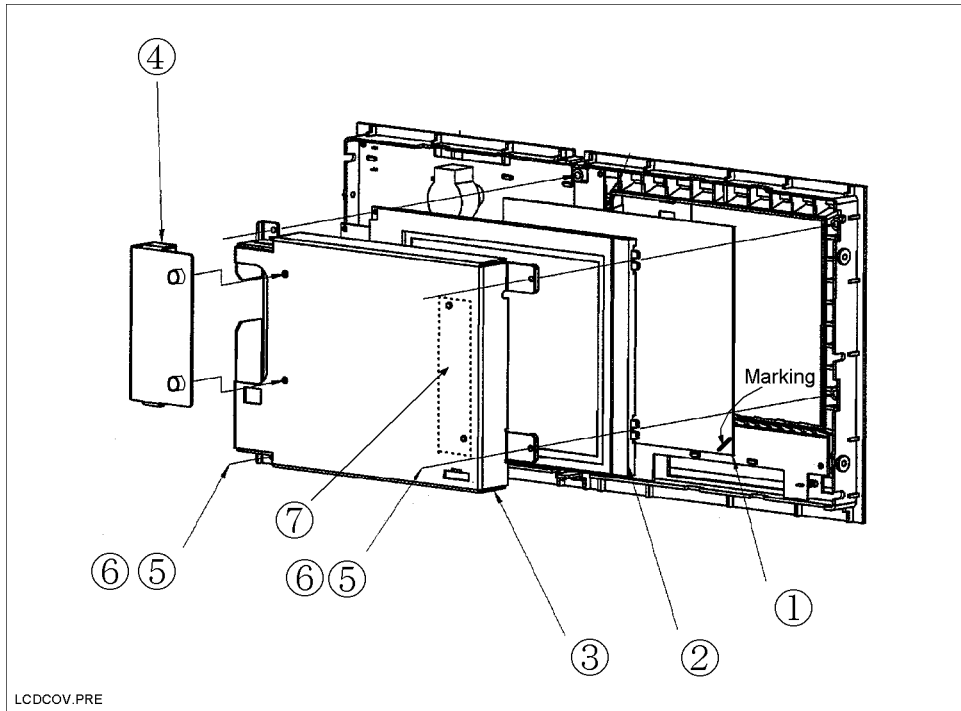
HP 4155B/4156B Front Panel Assembly Parts Location (2 of 2)
